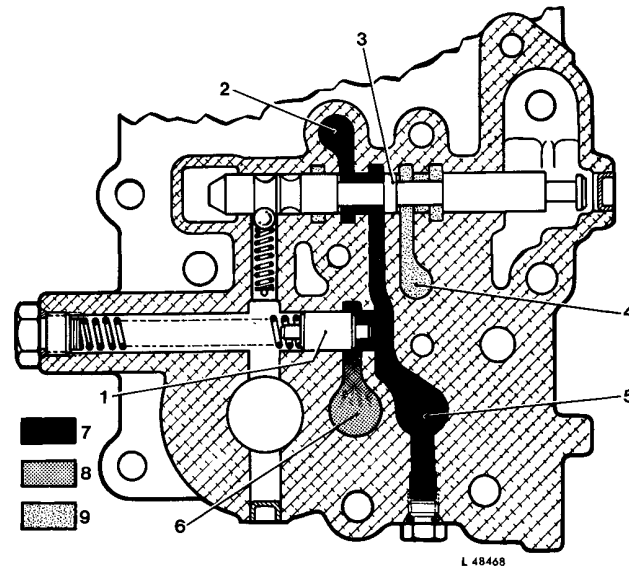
Operation of HIGH-LOW Control Valve Assembly
